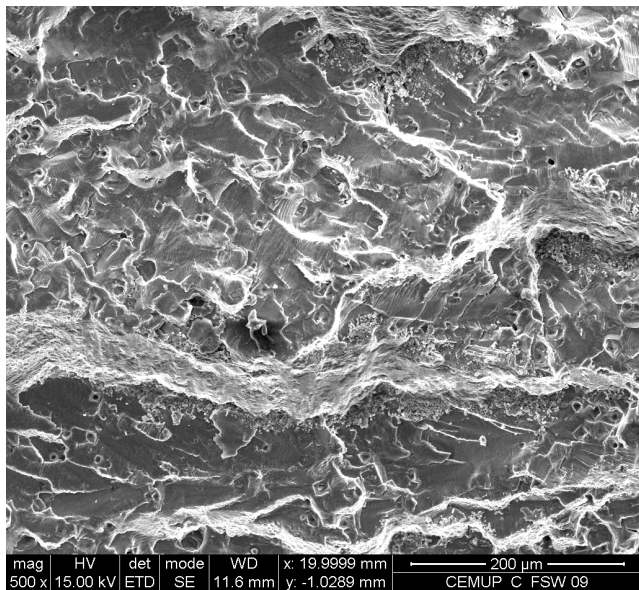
Fracture surface outside the TMAZ, fractograph 34.
